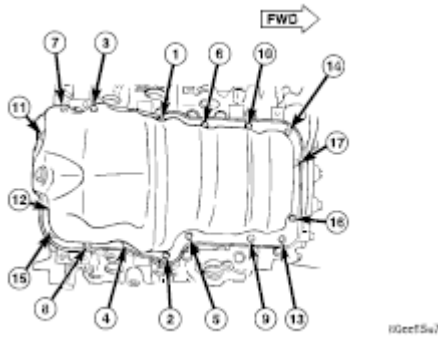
Identifying Removal & Installation Sequence Of Oil Pan Mounting Bolts
